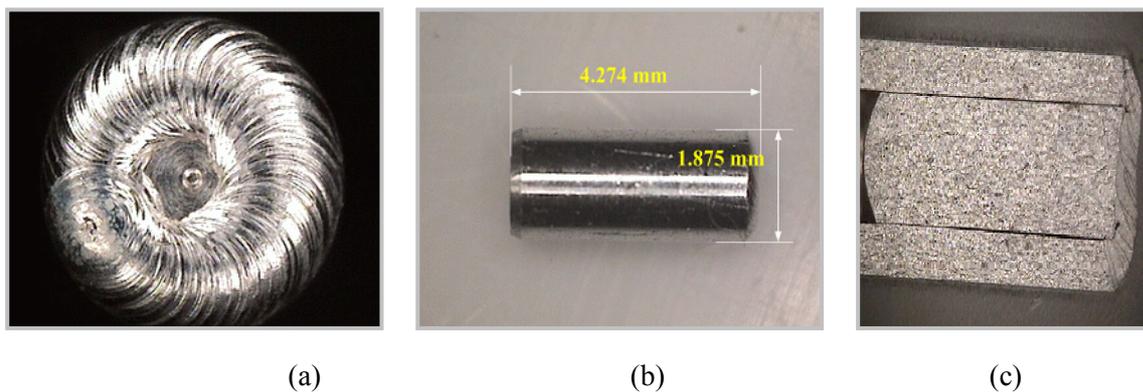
(a) Welding bead shape of target capsule, (b) photograph of target after welding and (c) microscopic view of welding cross-section.
